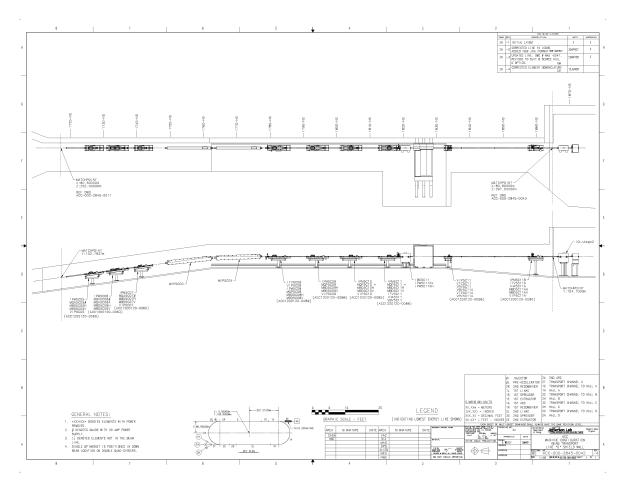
Machine interface drawing (ACC-000-2845-0042) for the beam line components upstream of the tagger area
